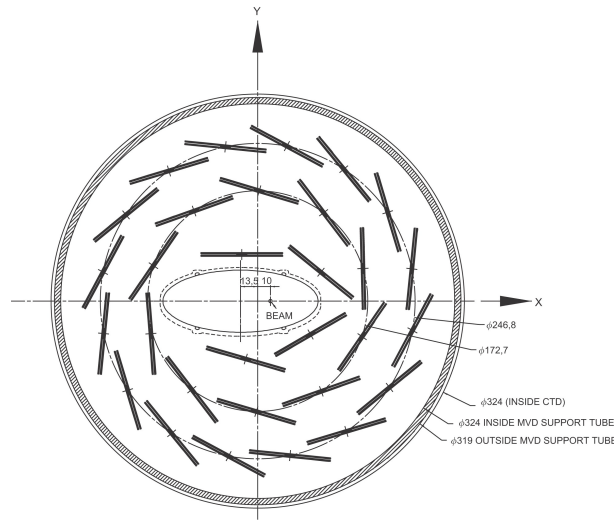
Layout of the silicon sensors in the barrel MVD, transverse cross section.
